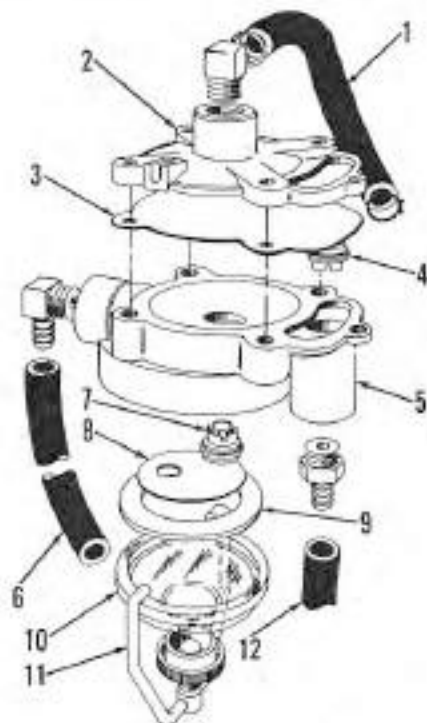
Exploded view of diaphragm type fuel pump. Refer also to Fig. Mc53.
